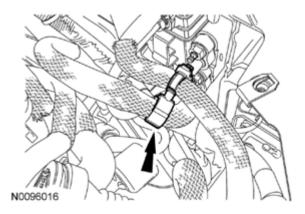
Locating Coolant Vent Hose Retaining Clip Of A/C Tube Courtesy of FORD MOTOR CO.
